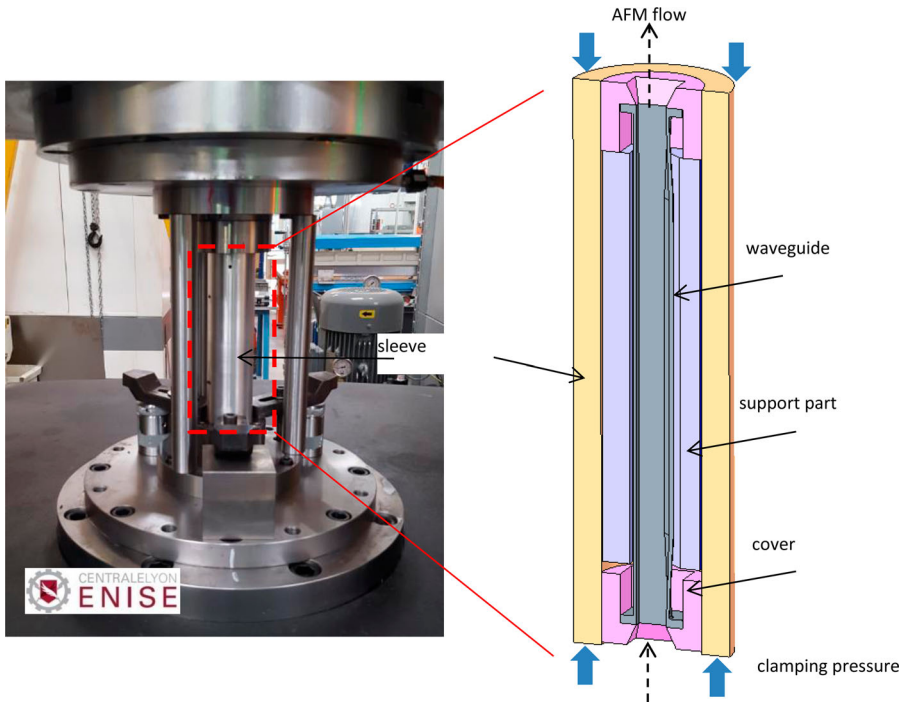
Experimental setup for AFM of internal surfaces in the HR (AlSi7Mg0.6) waveguide and its cross-section view equipped in the fixture parts.
